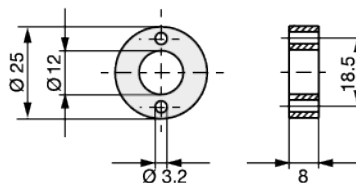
Installation dimensions of BTL-P-1012-4R position magnet
